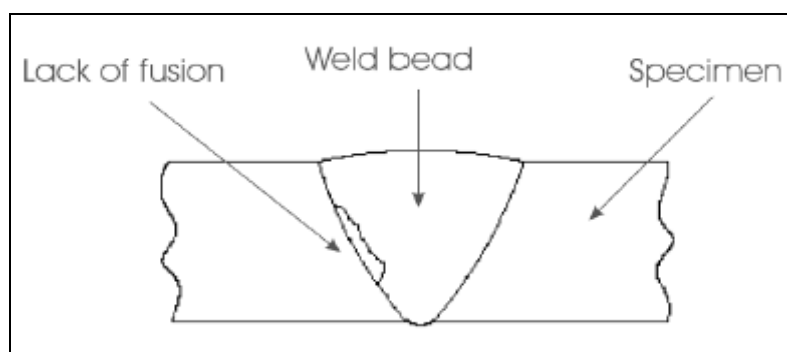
Welded Bead with a Lack of Fusion Defect [6].
